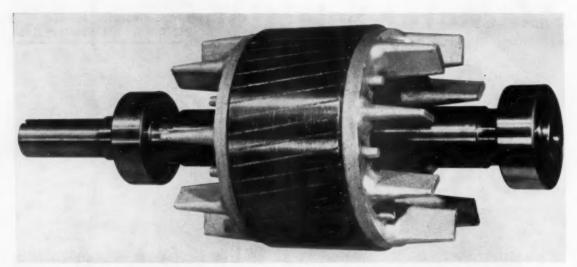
Typical cast squirrel-cage motor rotor construction. Rotor may also be fabricated from bars connected to end rings. Photo, courtesy Westinghouse Electric Corp.
